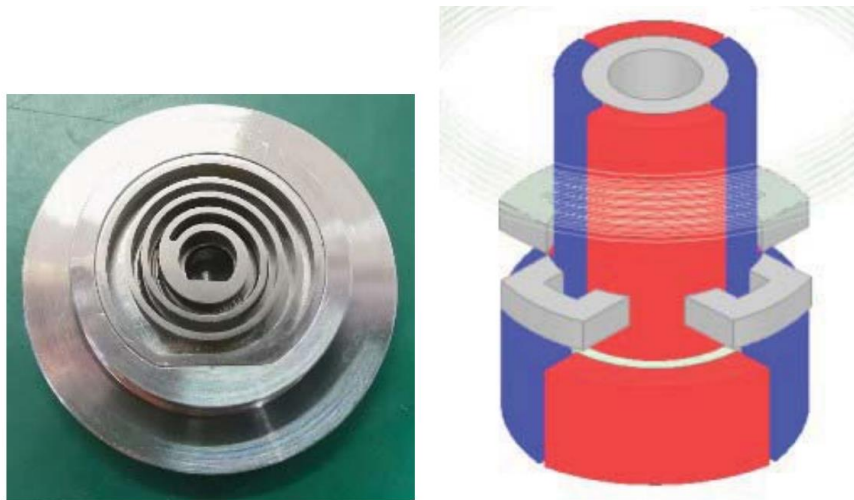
17: Restoration torque mechanisms: the traditional mechanical spring (left) and magnetic spring (right)
